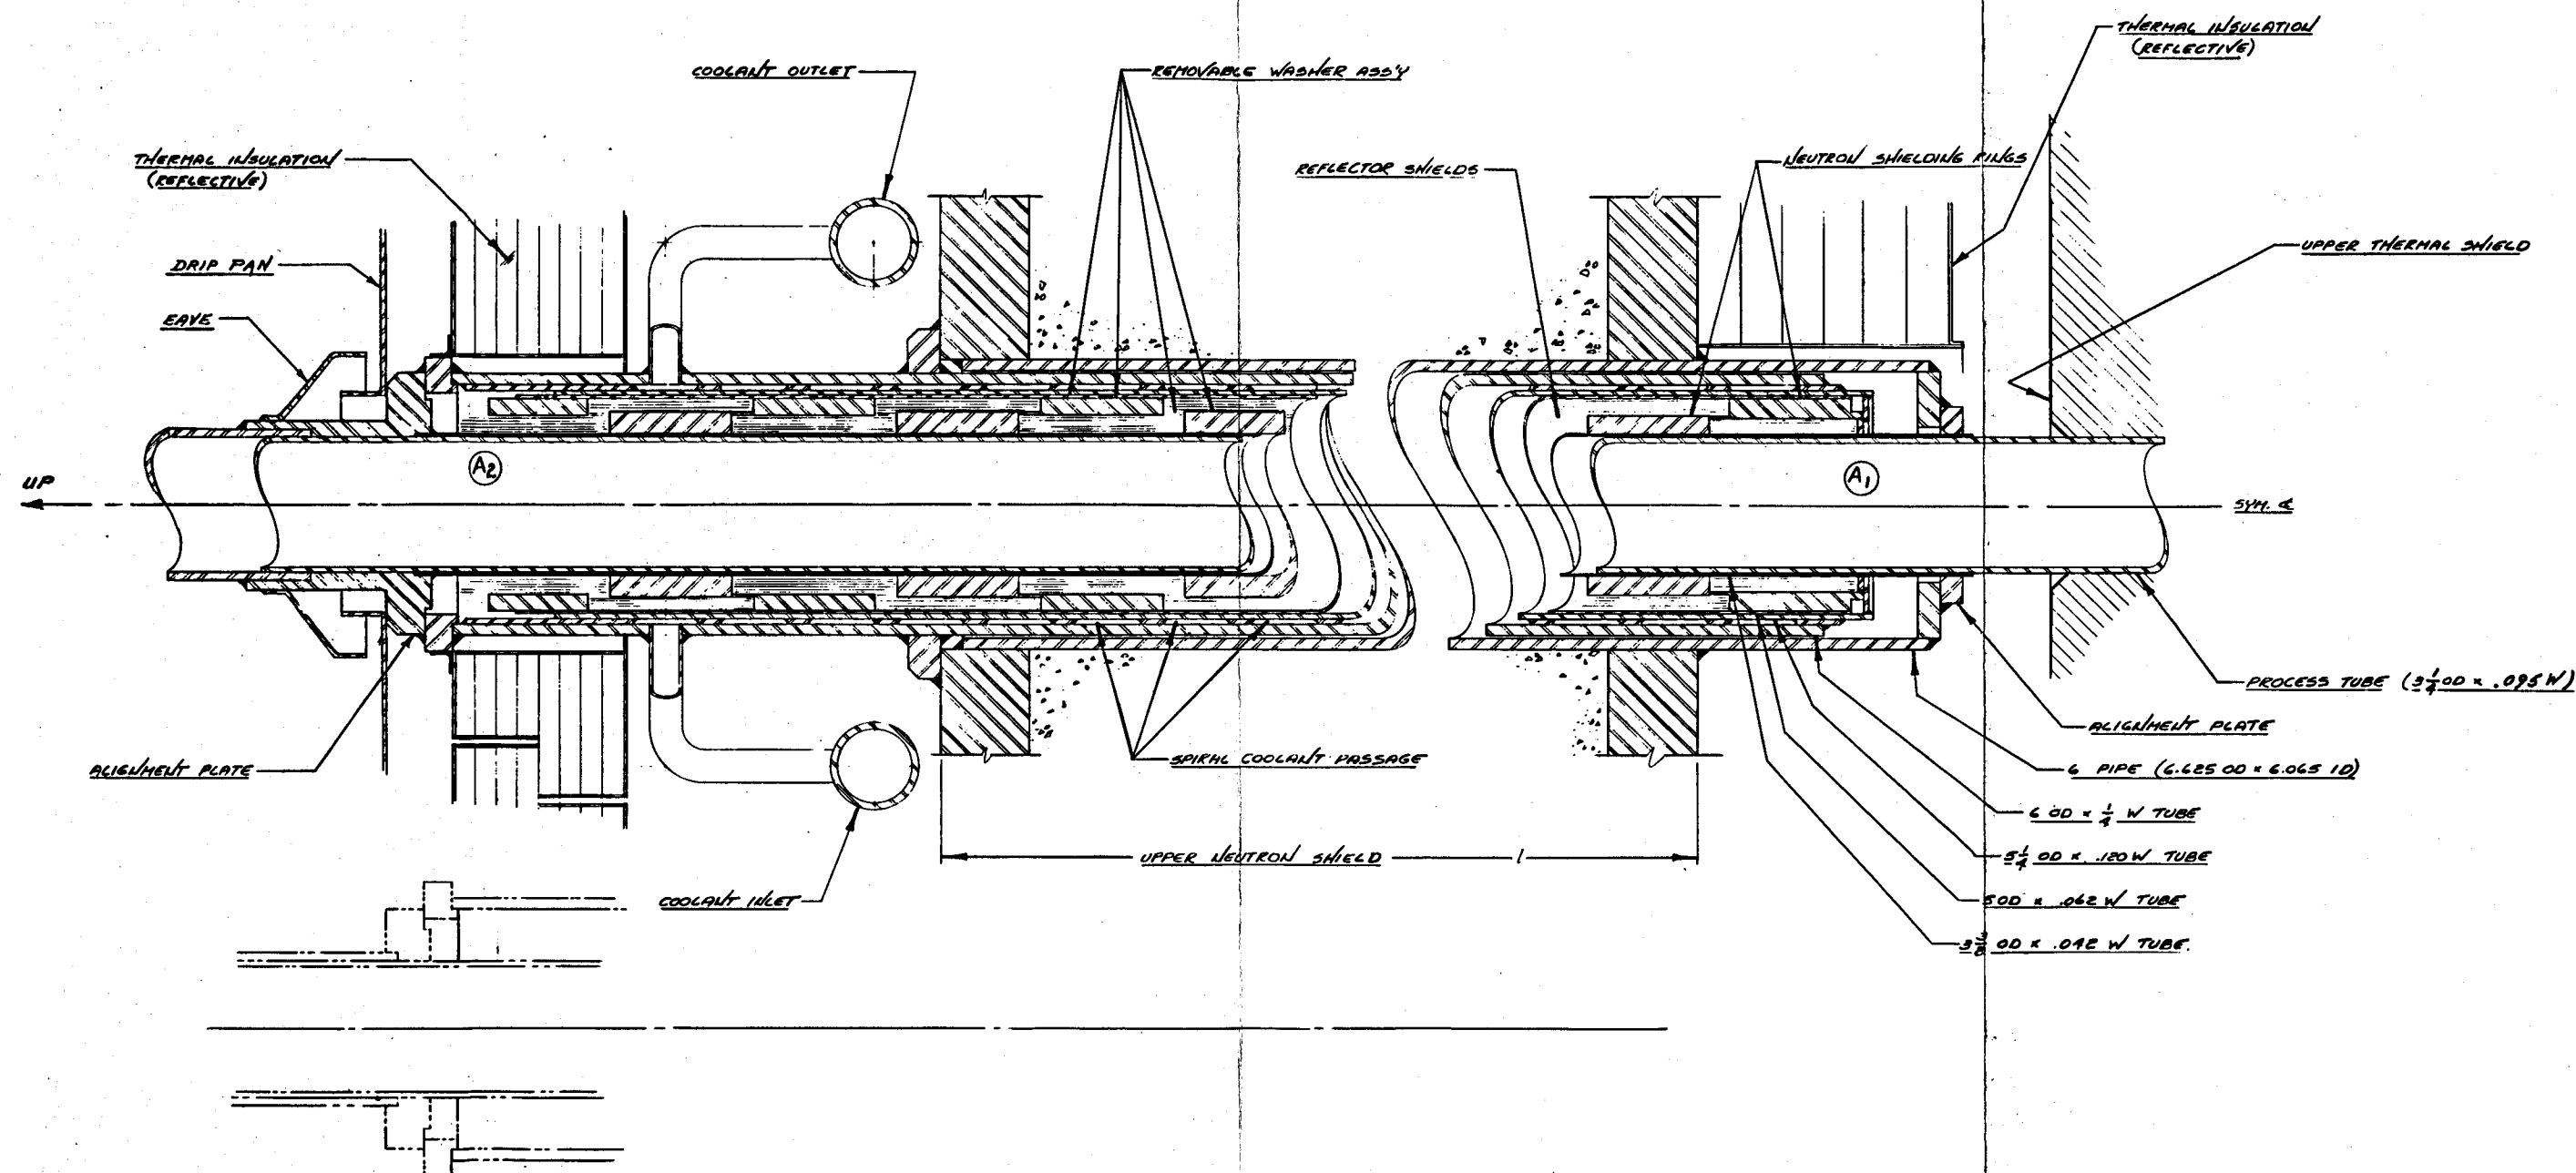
Shield Alignment Washer Assembly Upper Removable
